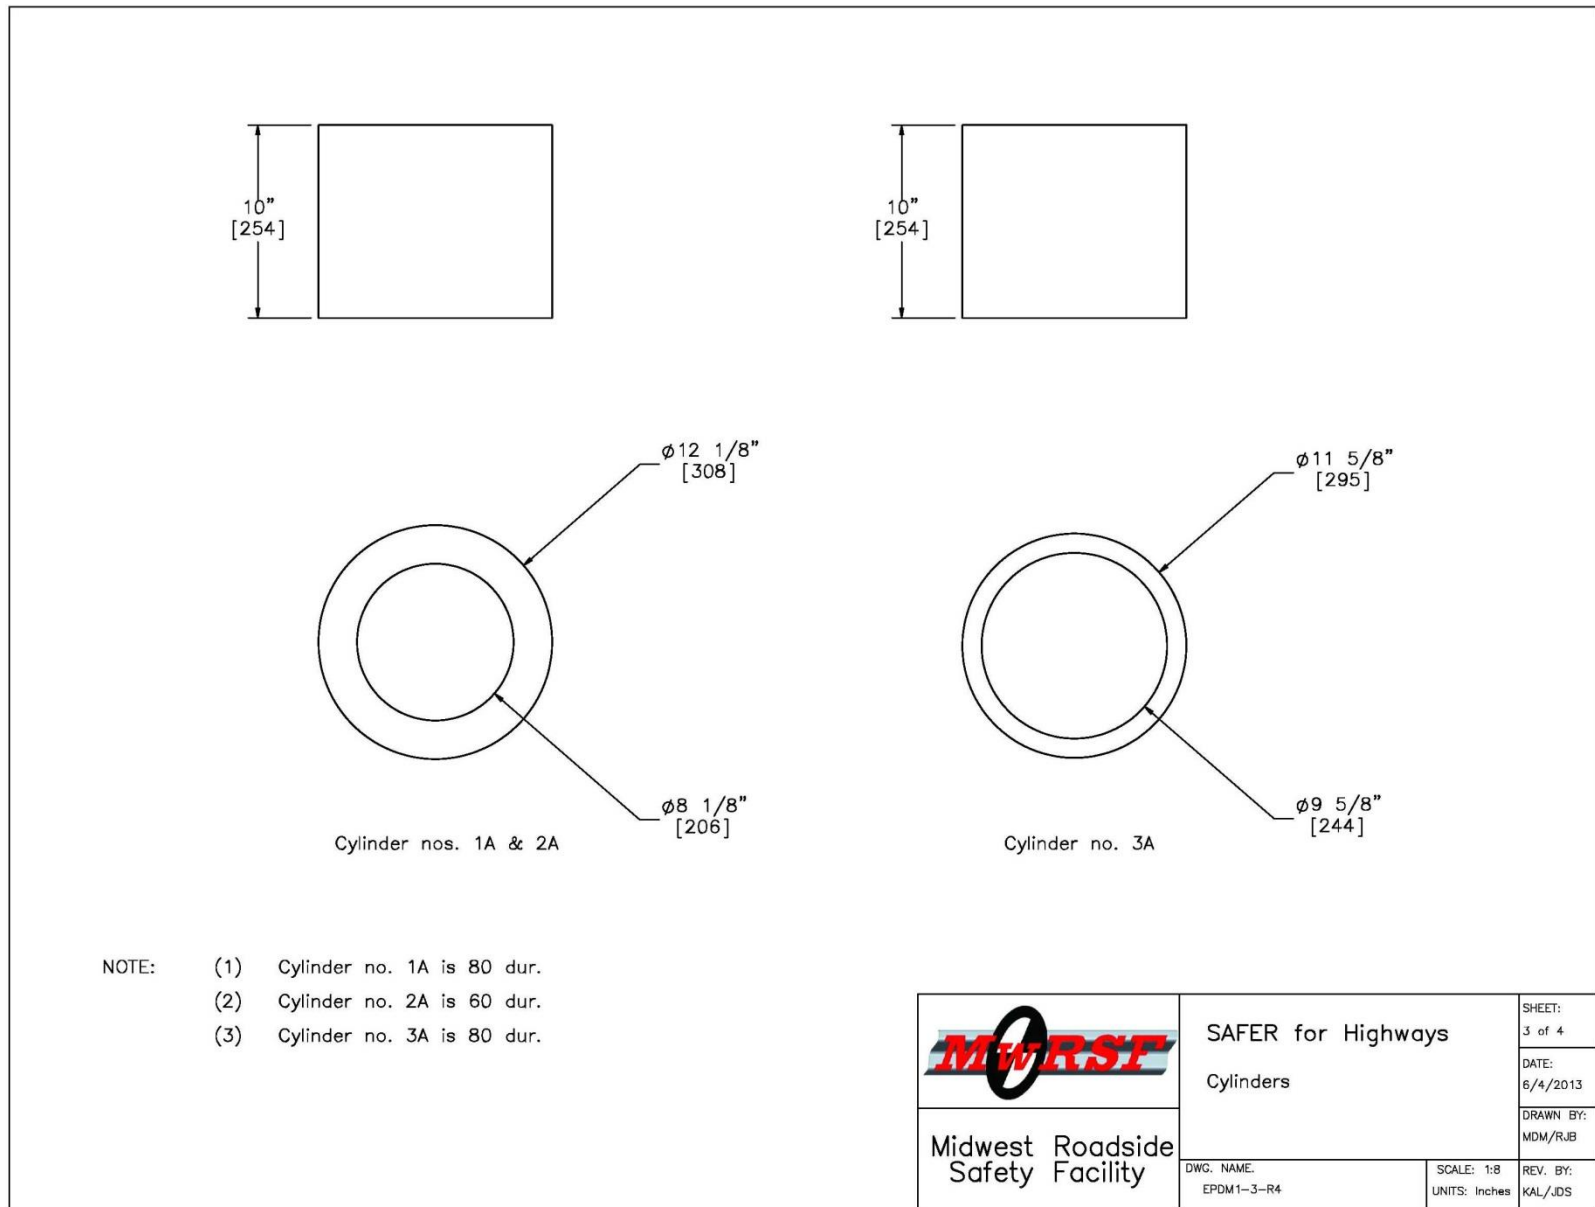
Rubber Cylinder Details, Test Nos. EPDM-1 through EPDM-3
